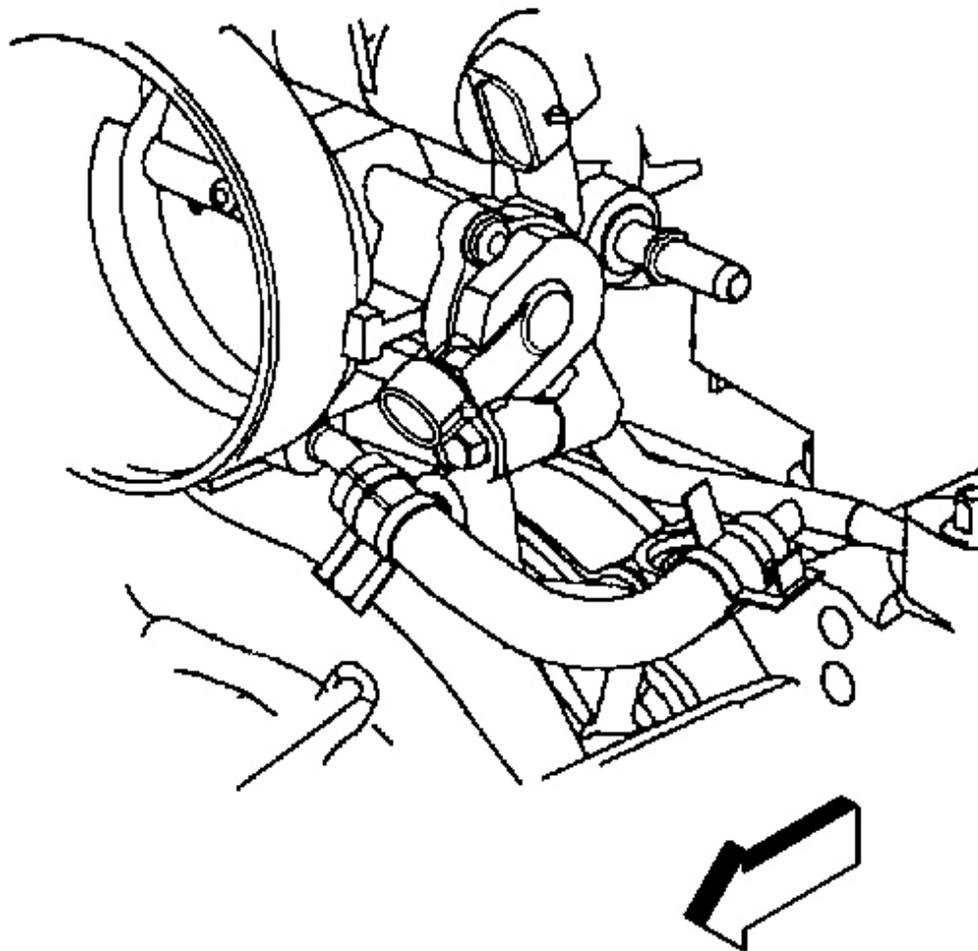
Coolant Air Bleed Hose & Clamp At Throttle Body
